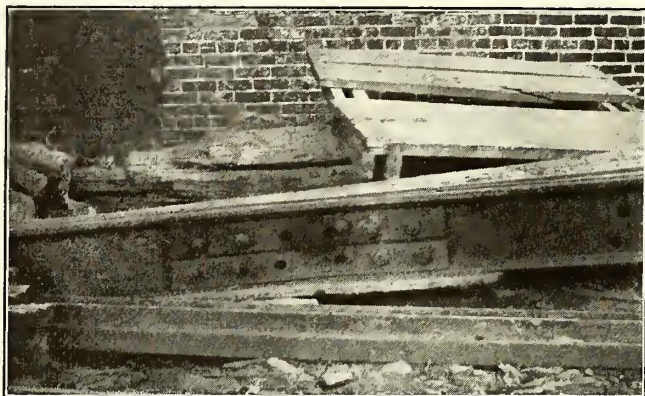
FROG AFTER WELDING ON BASE PLATE BUT BEFORE WELDING JOINT PLATES
